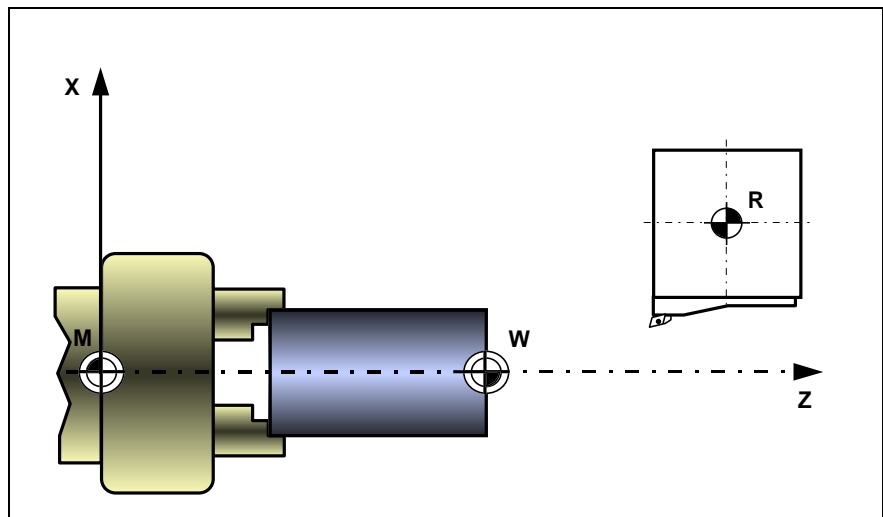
Zero points—lathe (machining ahead of the center of rotation)
